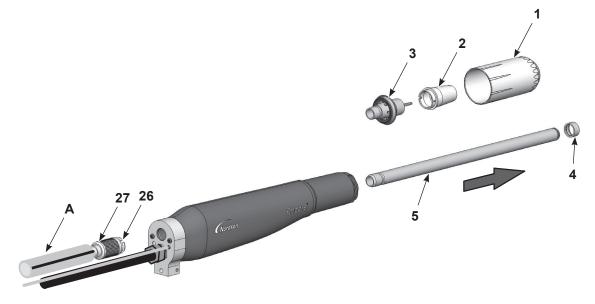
Maintenance – Bar-Mount Gun Shown without Pivot Mount
